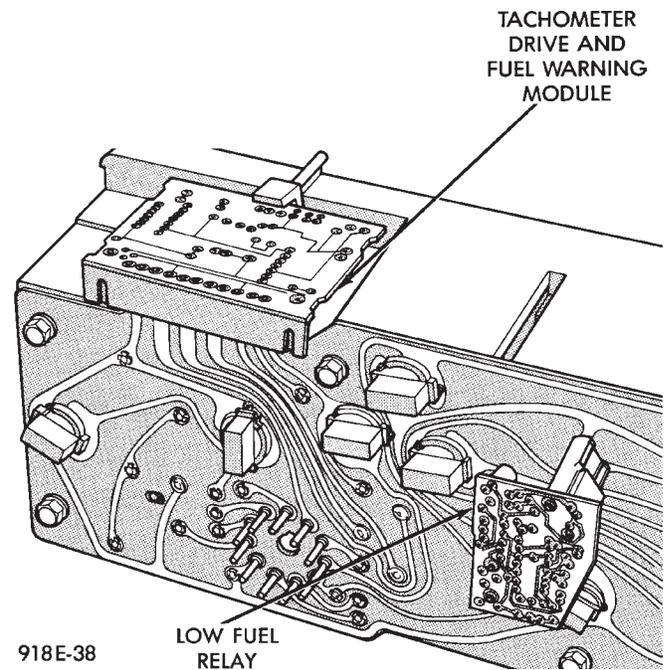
Tachometer Drive and Low Fuel Warning Module
